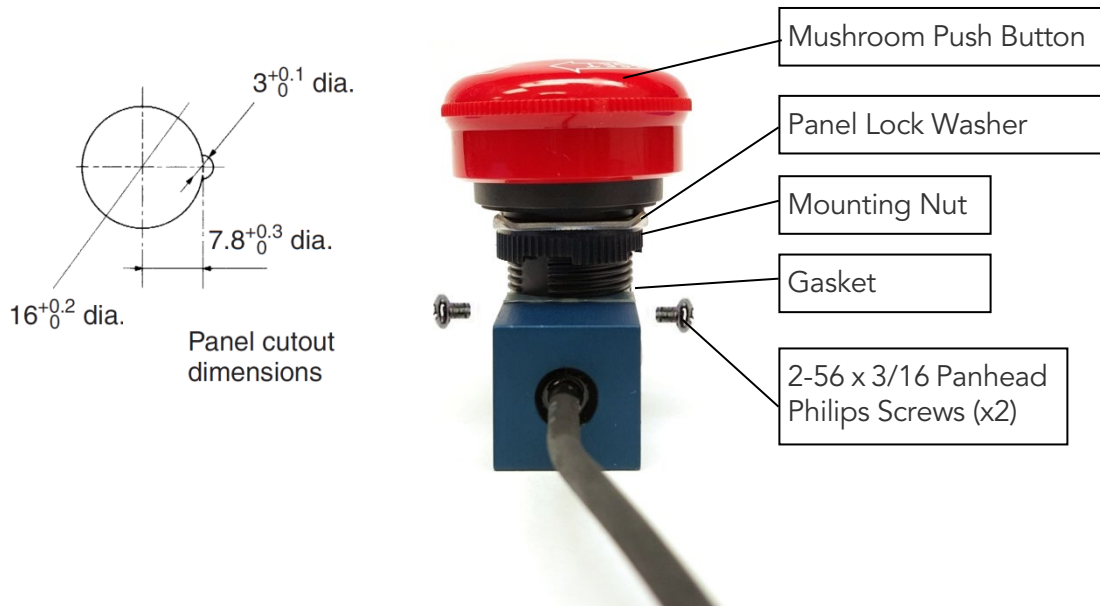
Panel Cut Out Dimensions and Assembly Hierarchy of E-Stop Switch
